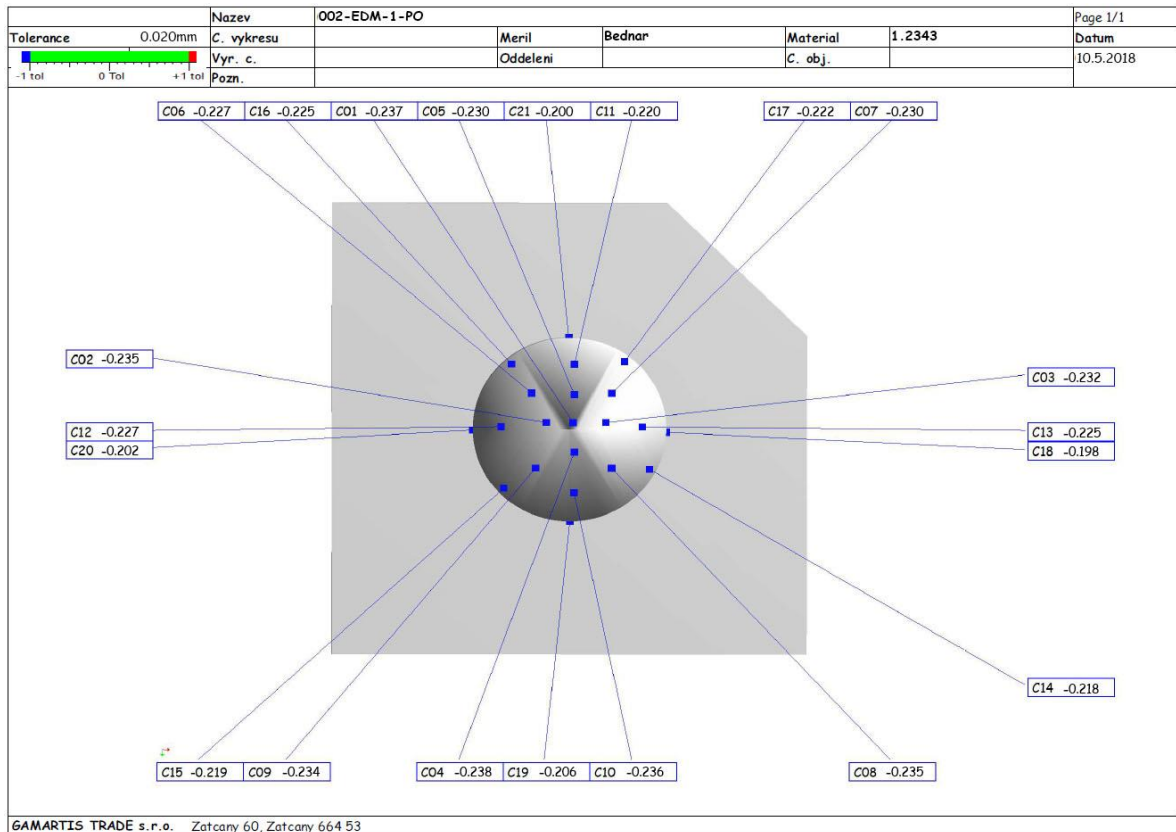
EDM-1 spherical shaped tool electrode measurement protocol after the EDM.
